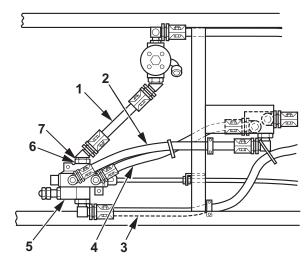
Hydraulic Hoses and Fittings Removal and Installation.
